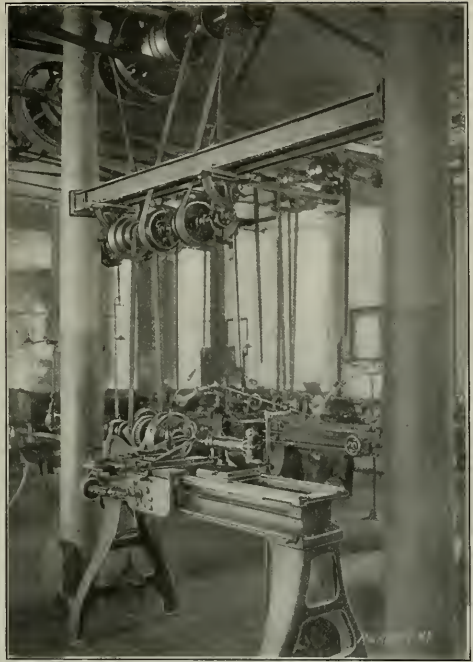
Engine Lathe beneath Lineshaft and driven by Short Belt from Countershaft.
